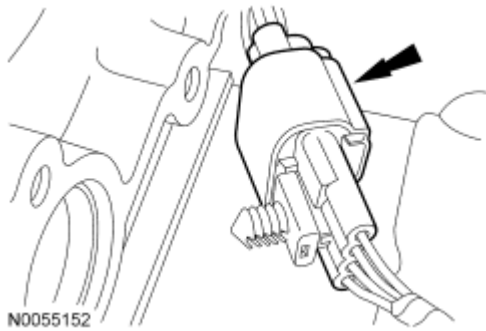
Locating Knock Sensor (KS) Electrical Connector
